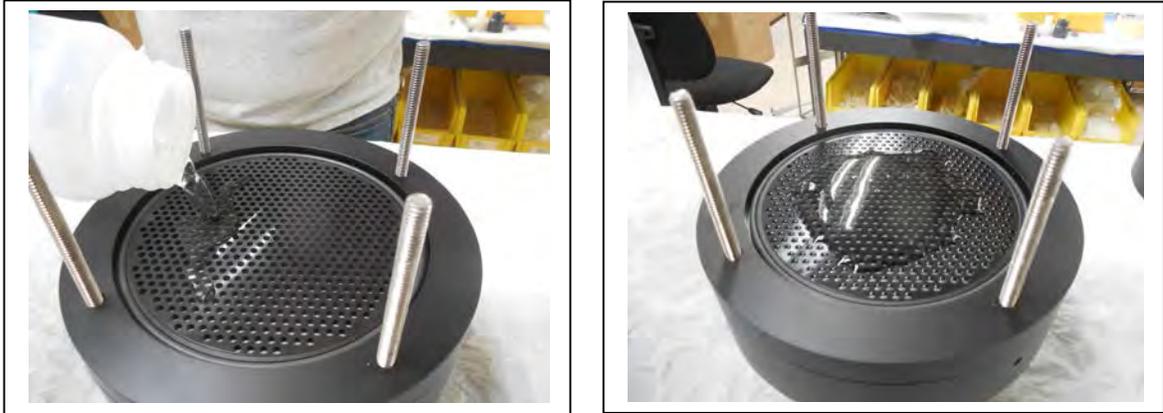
Seating the Pre-Filter Plate Rubber Gasket
